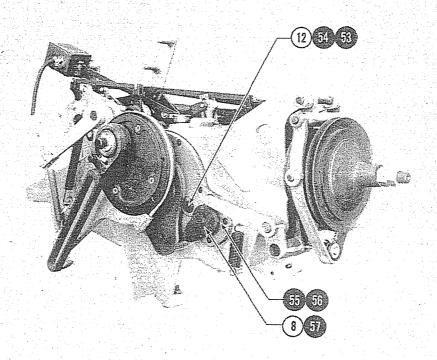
4 to 1 Shaft, Removal and Installation Sequence
